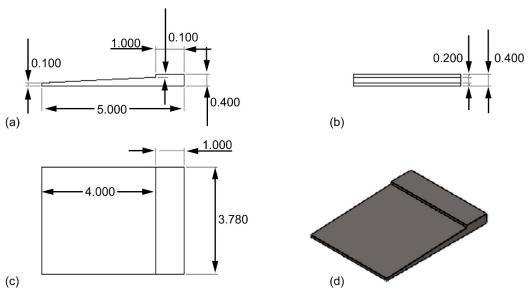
Thin generic fan blade fragment. Dimensions in inches. (a) Side view. (b) Front view. (c) Top view. (d) View of model.
